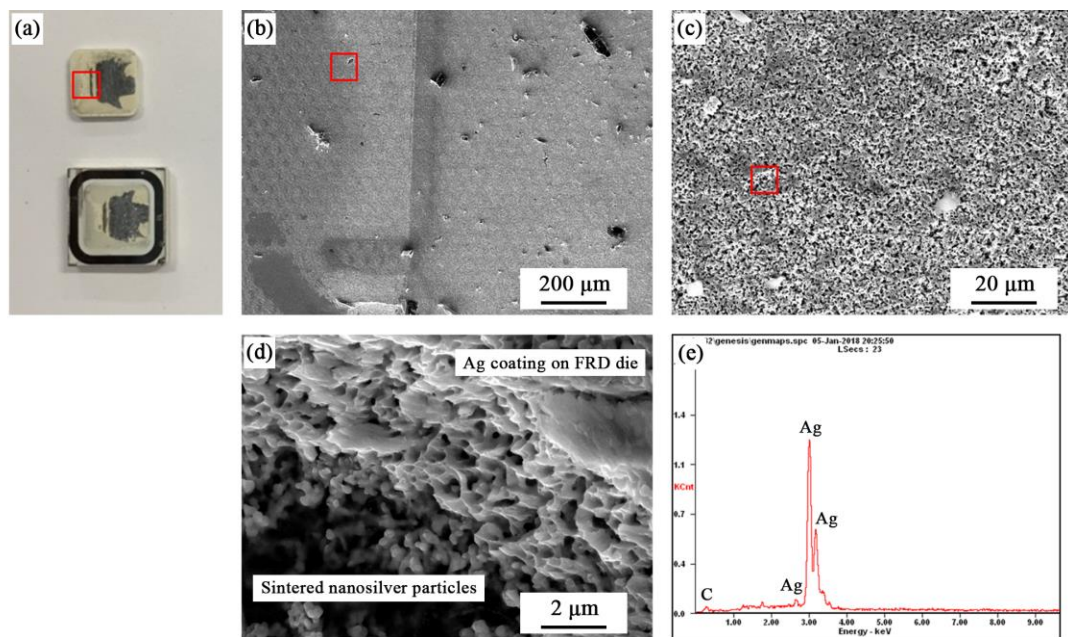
Fracture morphology of sintered package under 20 MPa, (a) optical image of fracture surface; (b), (c) and (d) are the gradually partial magnified image of (a); (e) EDS pattern of the fracture surface
